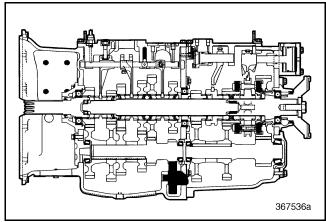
Reverse Idler Gear Component Locator (T313L/T318L Shown)
